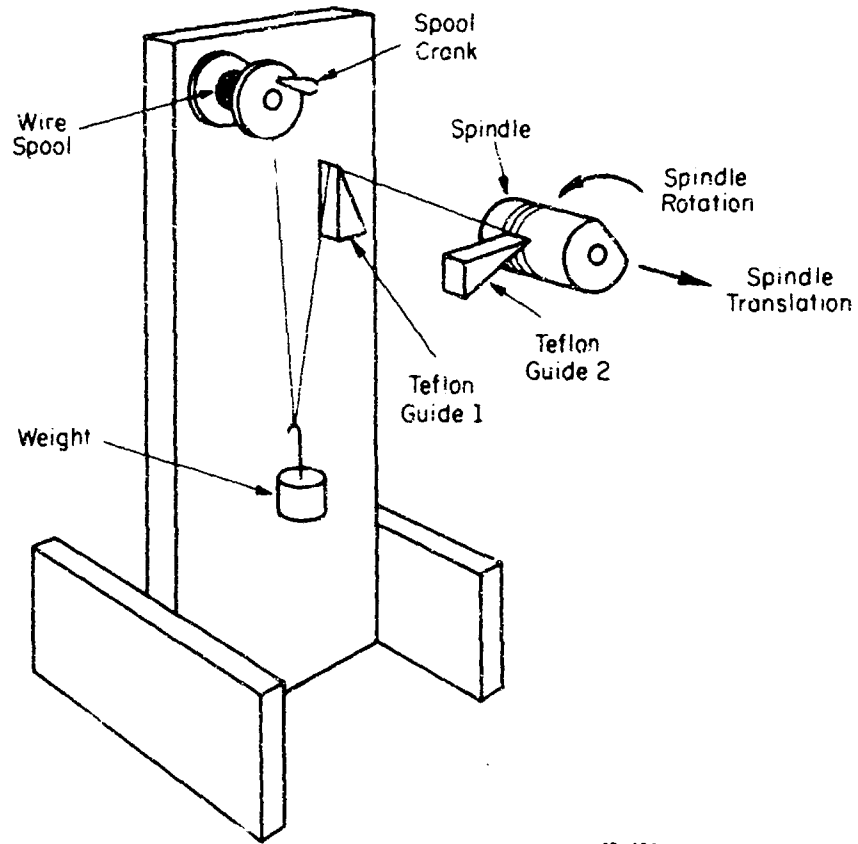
illustrates the wire-handling mechanism. The wire comes off the spool and passes over the first teflon guide. Between the spool and first guide a weight is hooked to the wire. The weight applies tension to the wire. It is insufficient, however, to cause the wire spool and spool crank to turn. Enough tension must be applied to insure a uniform grid. Too much tension will, of course, cause frequent wire breakage during the winding process. (Too little tension can allow the wire to snag on the spool while it is being unwound. As the wire pulls free the weight drops, and the high acceleration at the end of the drop can cause the wire to break.)
